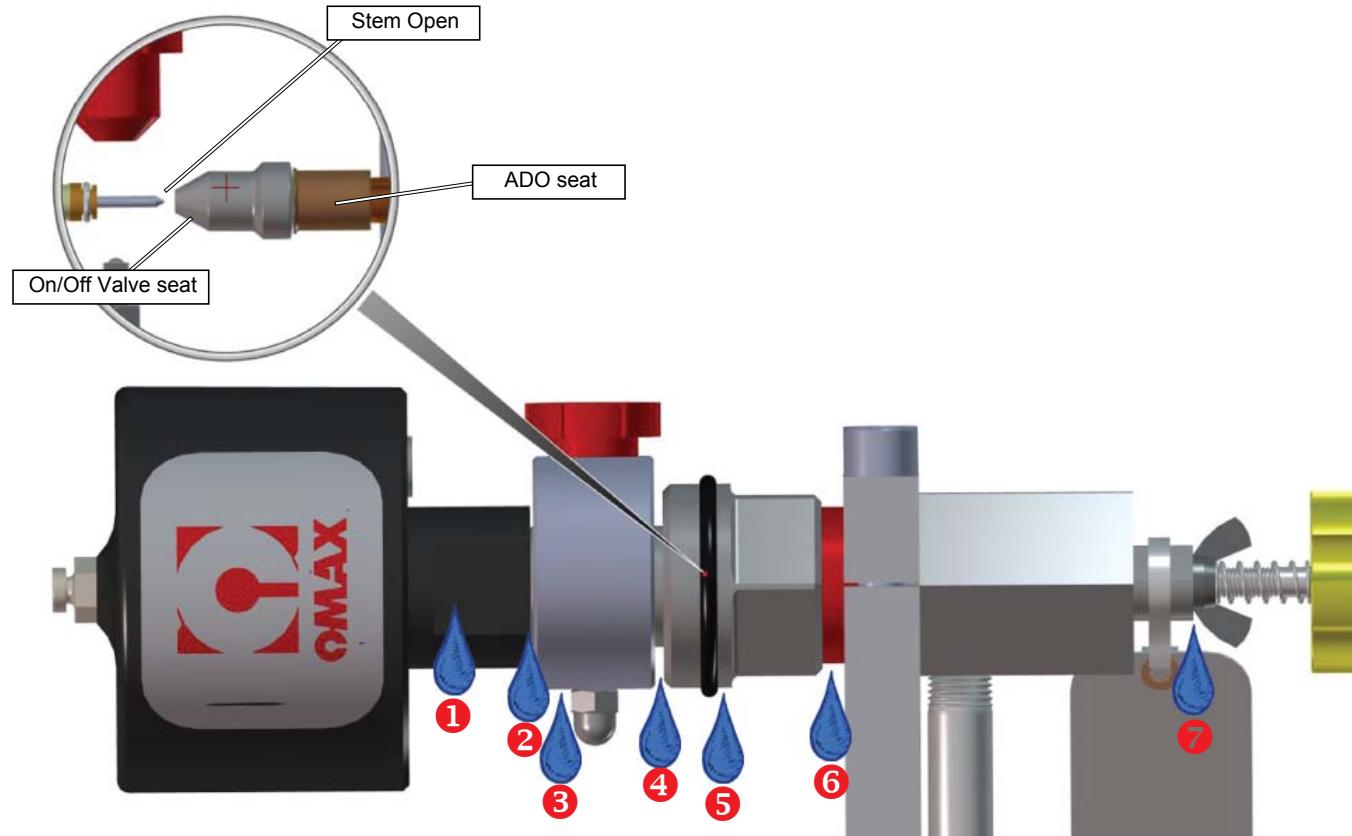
Sources of Water Leaks in the ADO Assembly
